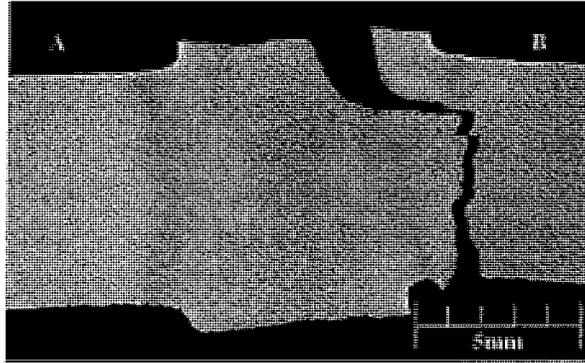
Cross Section of a Flash Welded Seam with a Hook Crack
